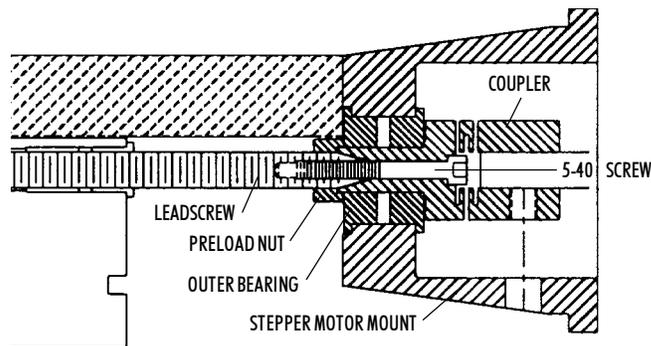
A cross-section of the stepper motor mount shows how the coupler is attached to the leadscrew.
